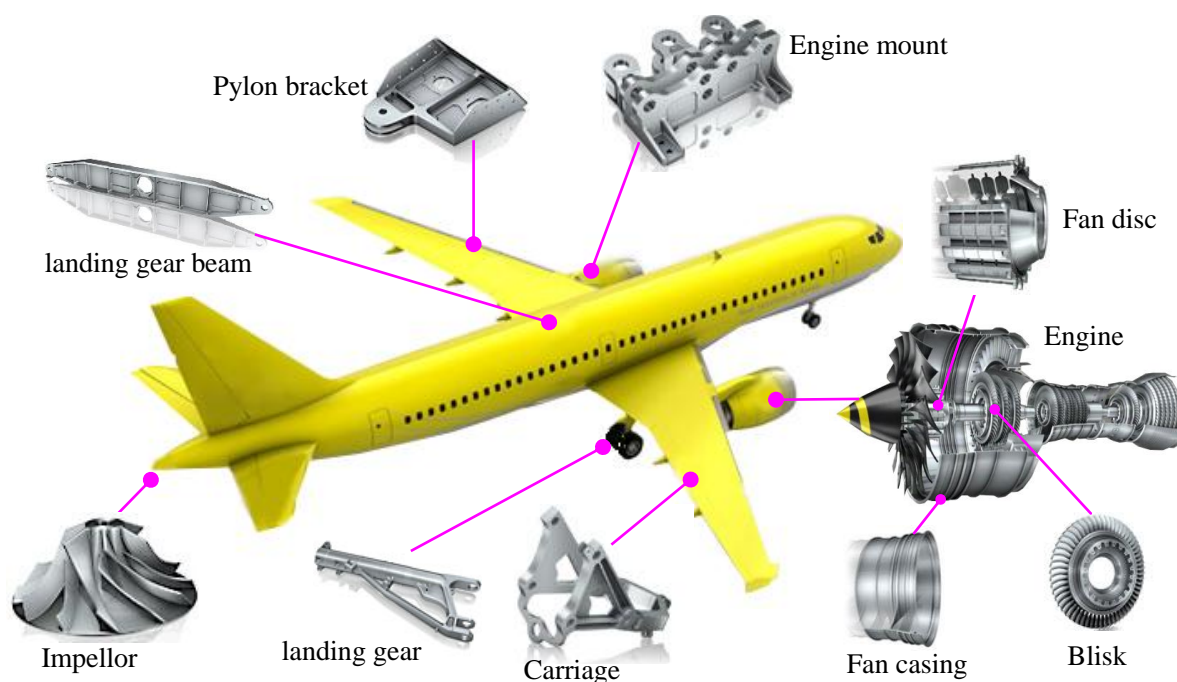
Typical aerospace parts shaped by machining [[SAN11](#)]
